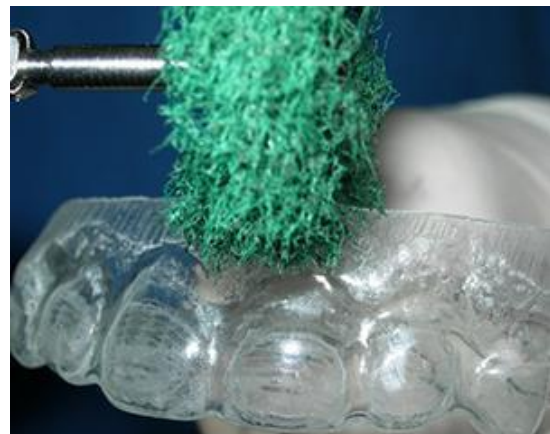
Finishing margins of vacuum formed matrix with rotary abrasive wheel
